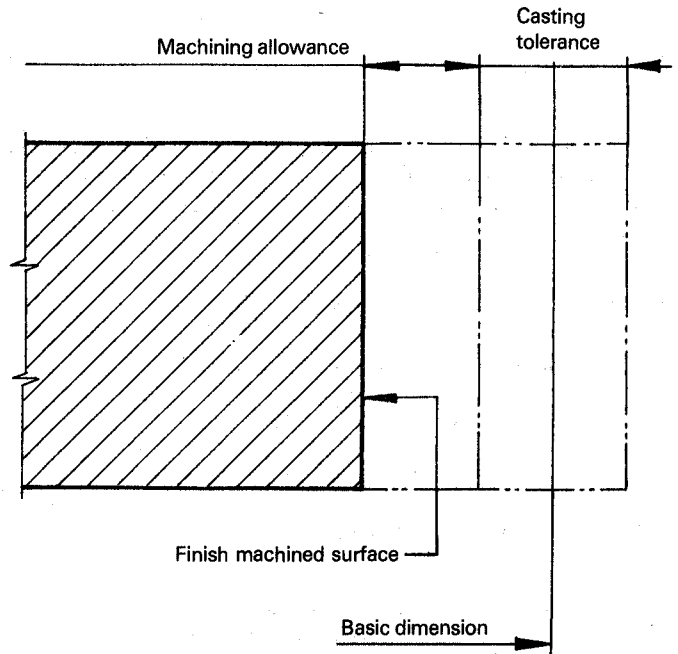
Relationship of component with machining allowance showing the tolerance symmetrically disposed about the basic dimension
